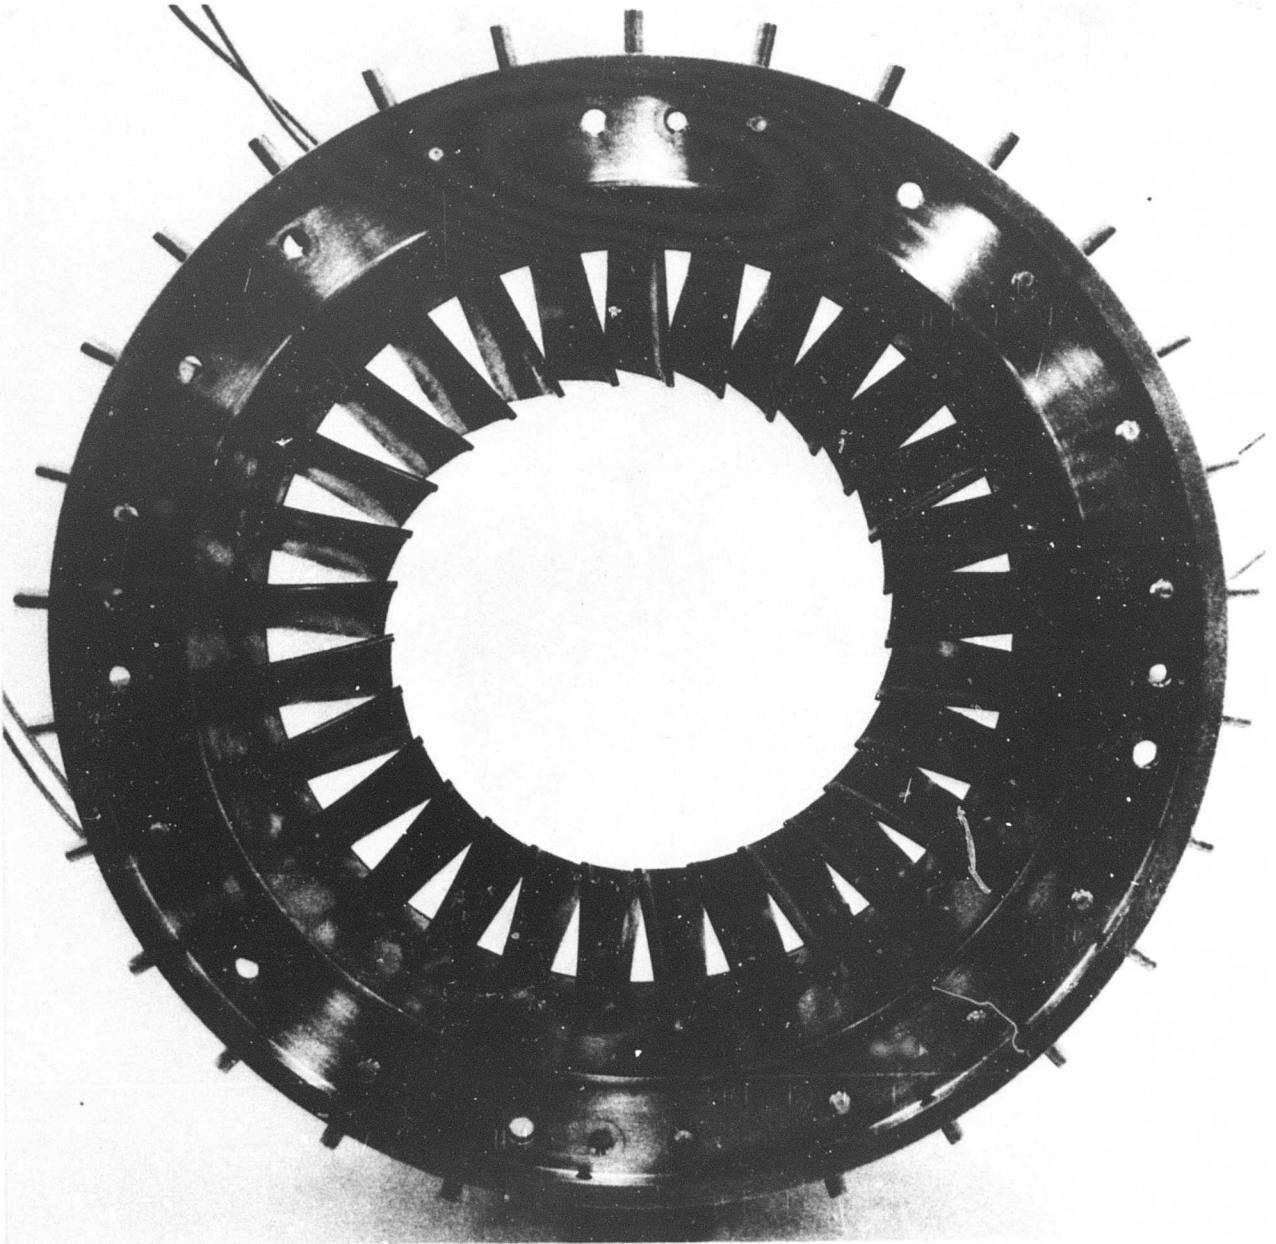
Developed Airfoil Inlet Guide Vane Assembly - Front View
